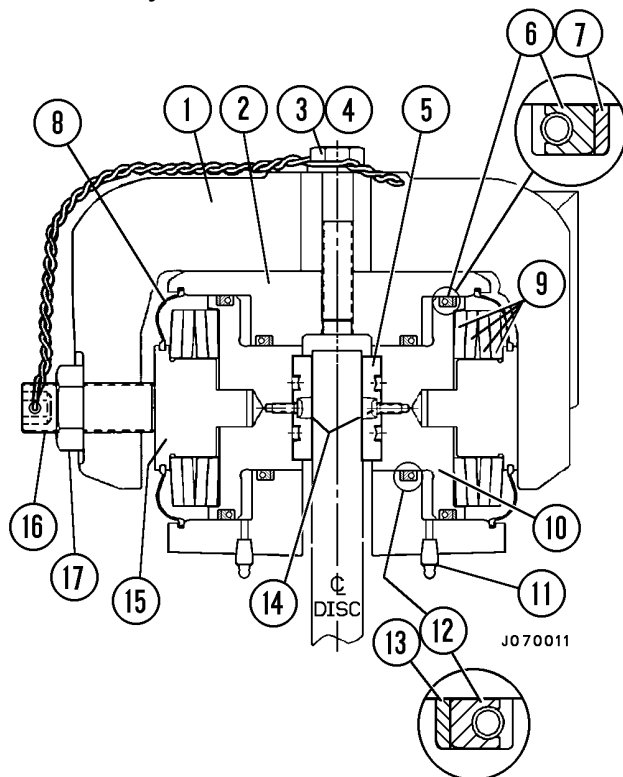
PARK BRAKE ASSEMBLY (SCL70-4)
